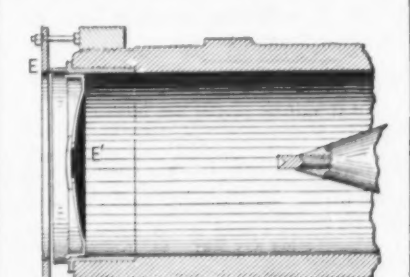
Enlarged View of Muzzle End of Gun, Showing the Two Muzzle-Valves.
